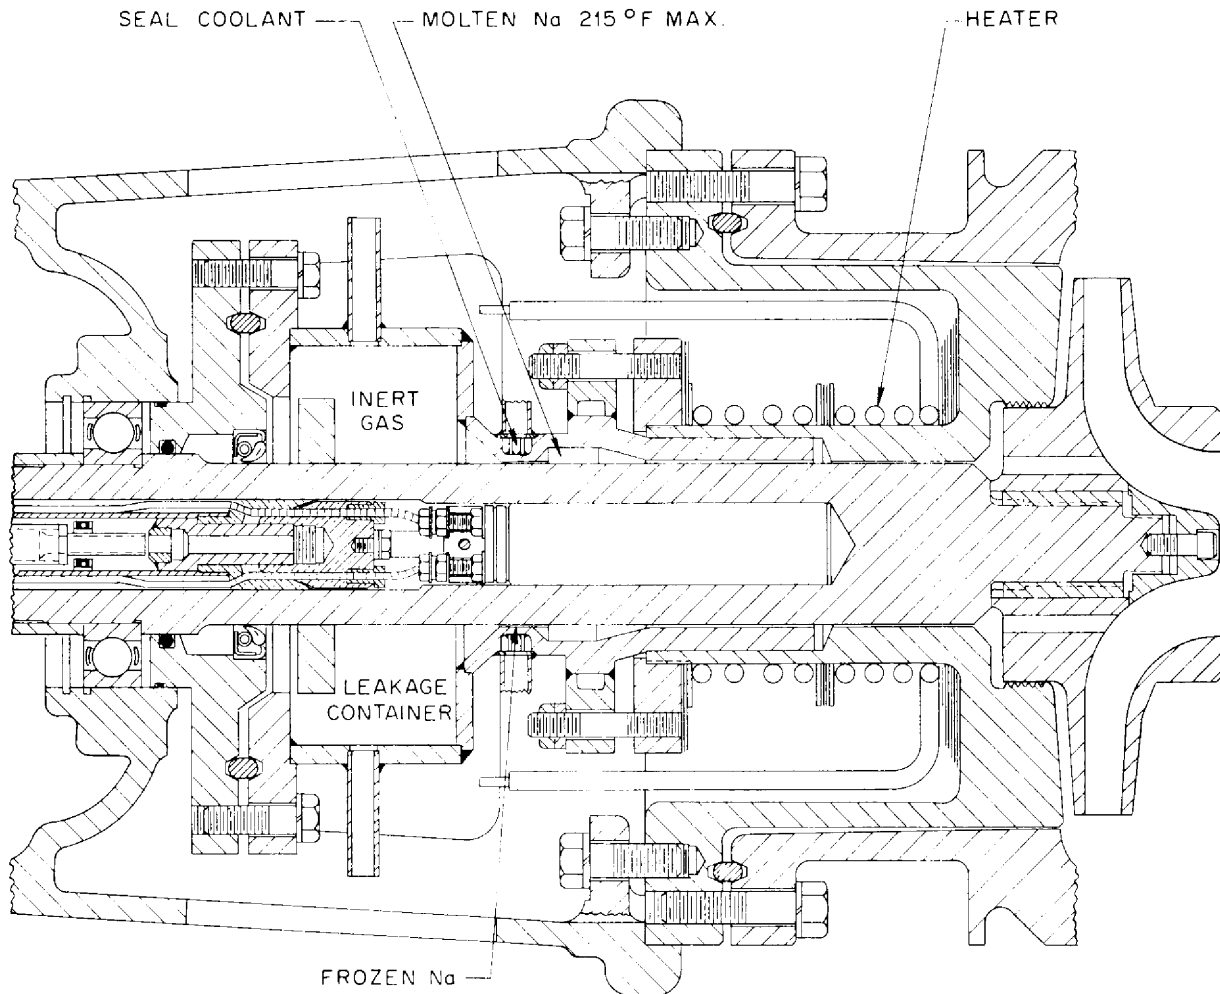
Frozen Sodium Rotary Shaft Seal.
